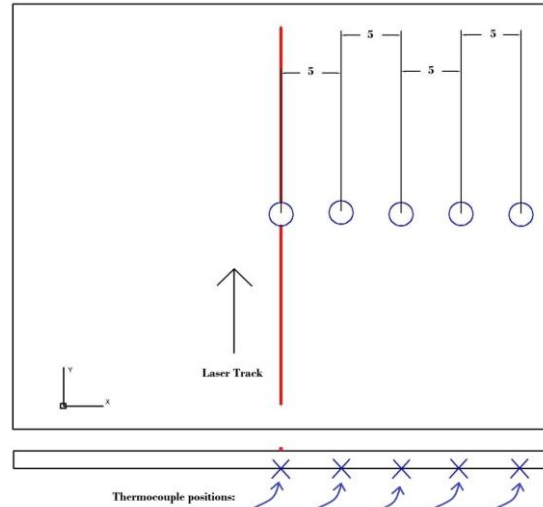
welding thermocouples in the favorite position, all dimensions in [mm]
